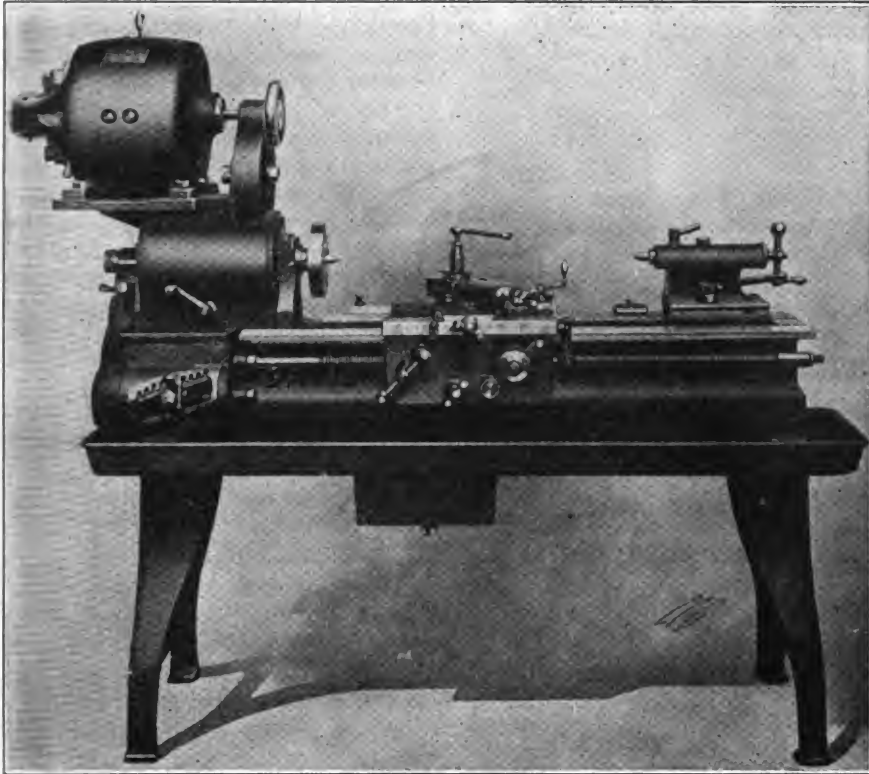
A MOTOR DRIVEN LATHE FITTED WITH AN ELABORATE CHANGE GEAR DEVICE
